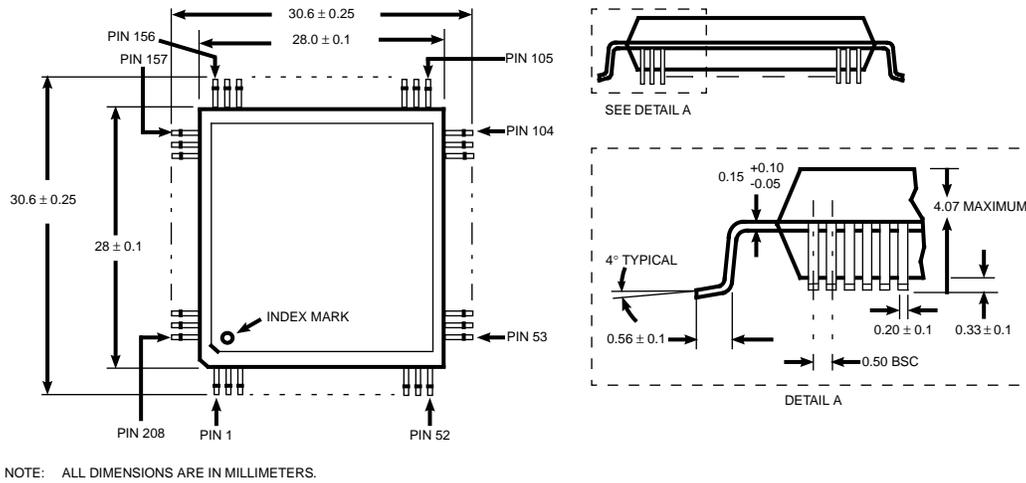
ISP1000/1000U/1040B 208-Pin PQFP Mechanical Drawings
